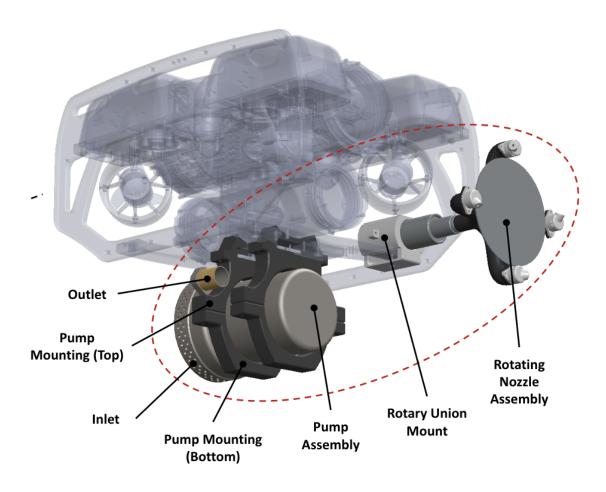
Final cleaning mechanism assembly fully integrated with underwater vehicle.
